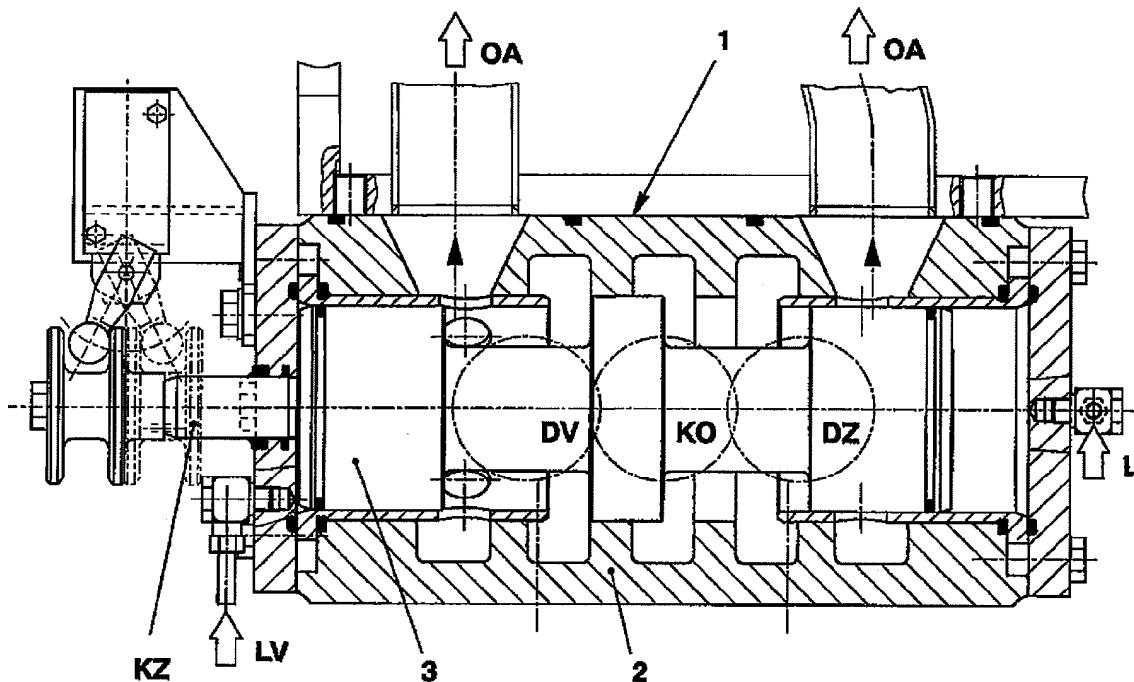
Cross sectional view of Reversing valve for SULZER RTA84 T-B engine
